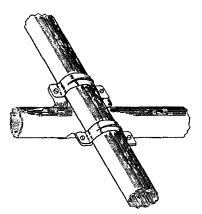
A really rugged method of fastening beam elements to a boom in an all-metal array. Pairs of pipe clamps back-to-back do the job. (Suggested by W2AOE.)
